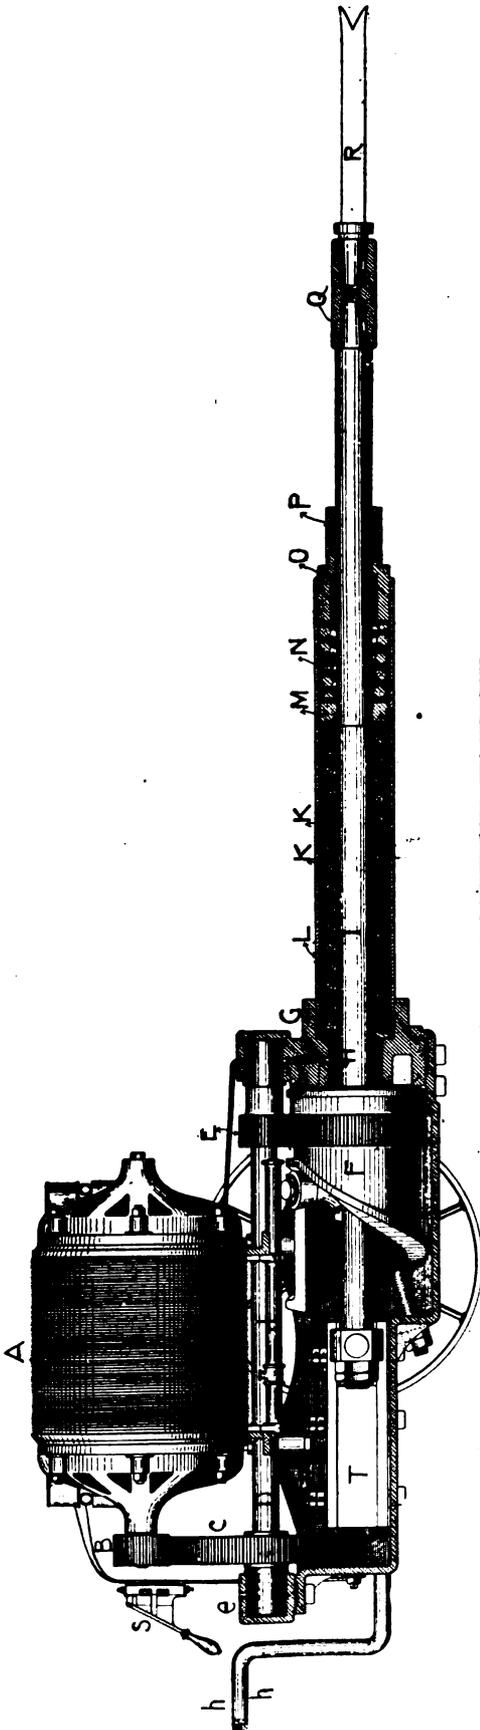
SIDE VIEW WITH ONE HALF OF THE MACHINE REMOVED.
